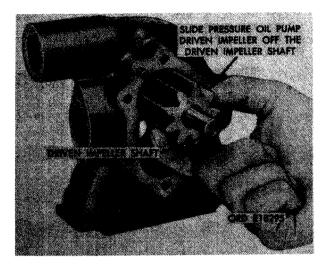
REMOVING OR INSTALLING PRESSURE OIL PUMP DRIVEN IMPELLER.
